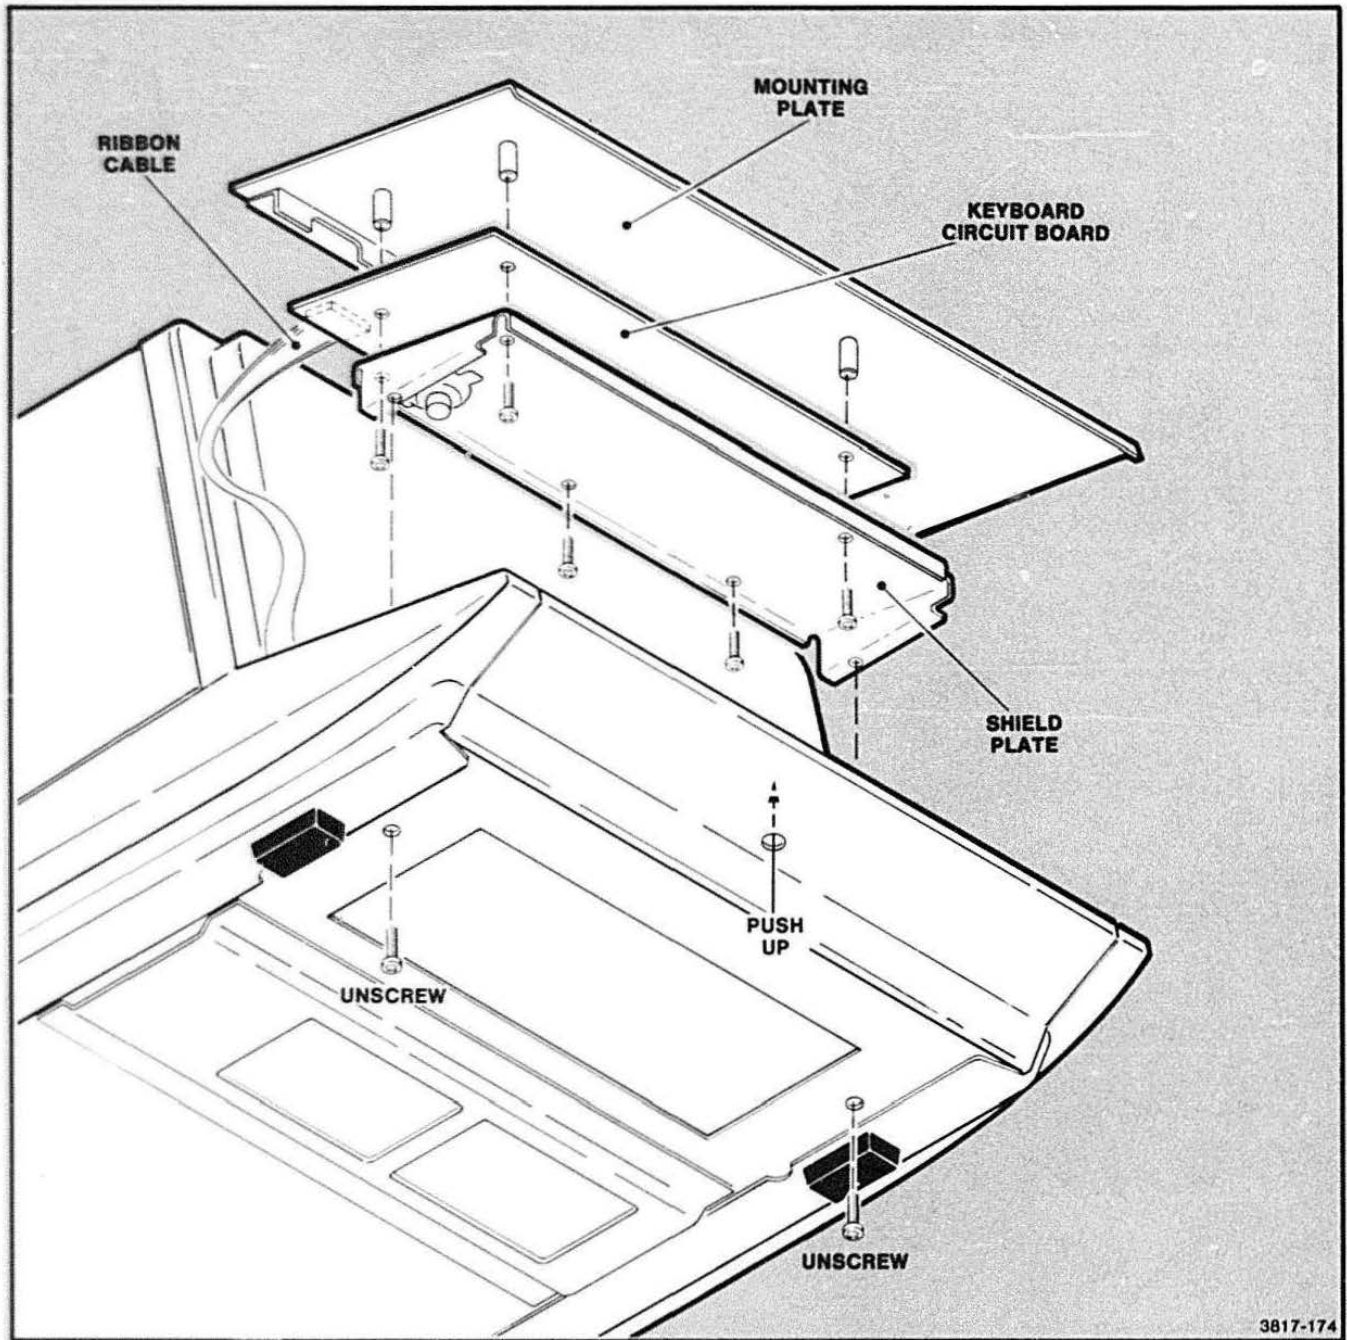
Removing and Disassembling the Keyboard Assembly.
